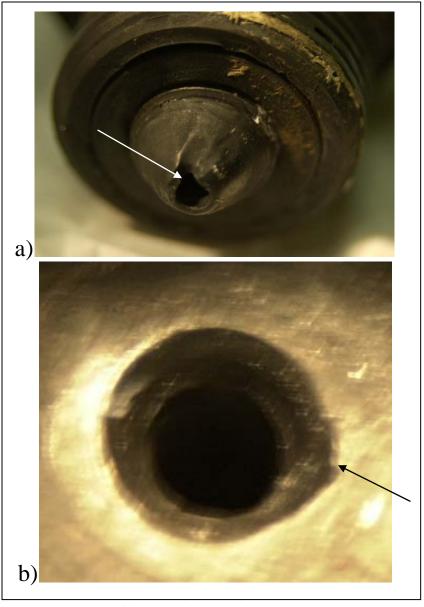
Vent valve failure, showing a) erosion around vent valve and b) erosion and elongation of closed bomb valve seat.
